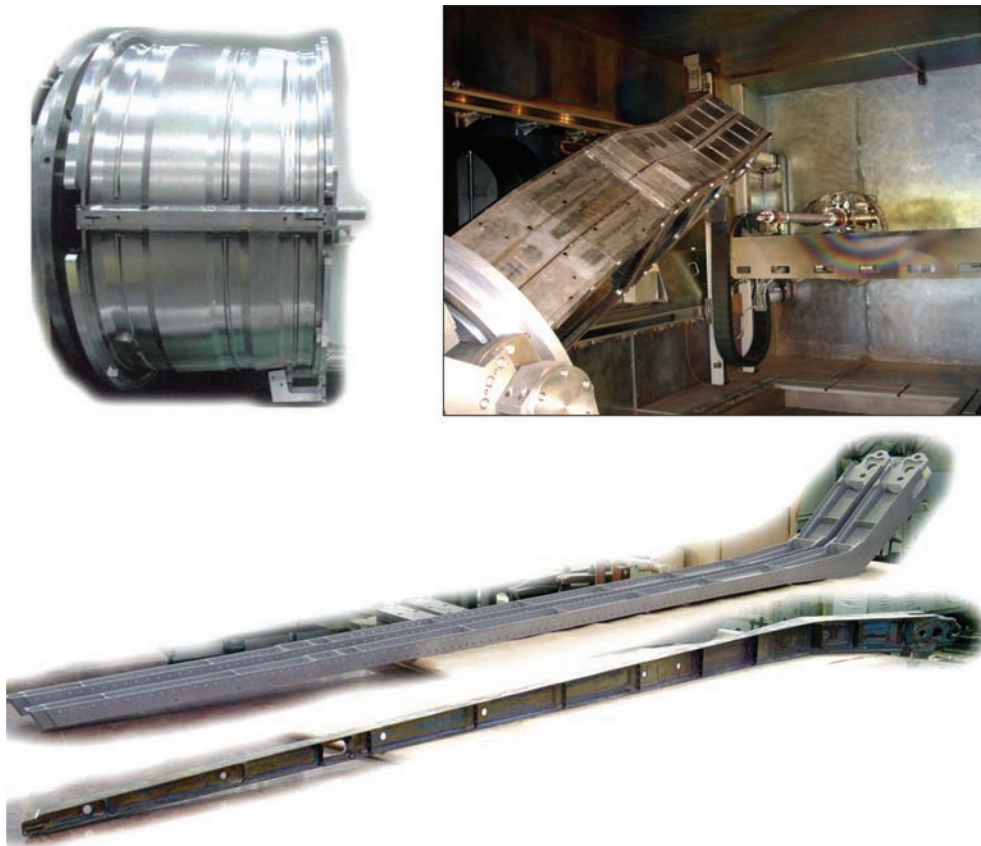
Examples of aircraft assemblies with intricate geometry, manufactured by EBW in the installations of medium and large overall dimensions
